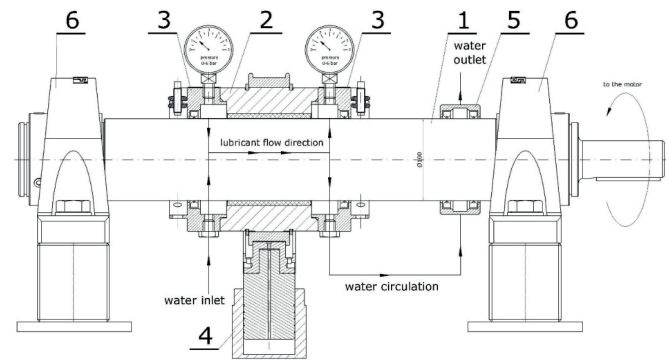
The test rig. 1 – 100-mm-diameter main shaft, 2 – steel sleeve with tested bearing bush installed inside, 3 – covers with lip sealings, 4 – radial load hydraulic jack, 5 – two lip seals module for measuring seal friction torque, 6 – guiding main shaft, self-alignment ball bearings
